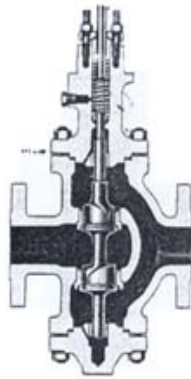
Reverse Double-Ported Globe-Style Valve Body
